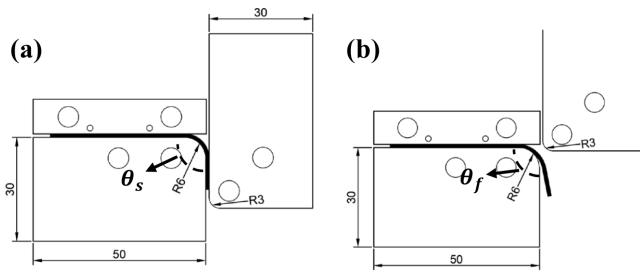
Deformation workpiece (a) without springback and (b) with springback in L-bending
